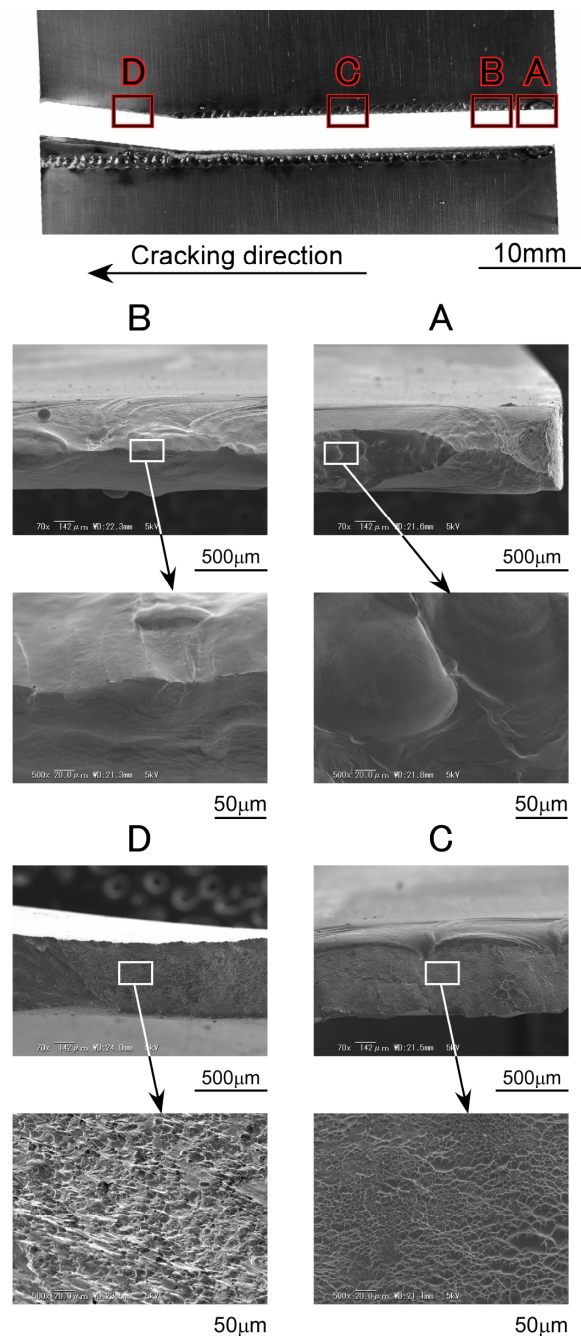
Appearance of crack on weld bead and fractographs of specimen. (V=1050mm/min, Q=400W, PW=5.0ms, P=5.9kN)
